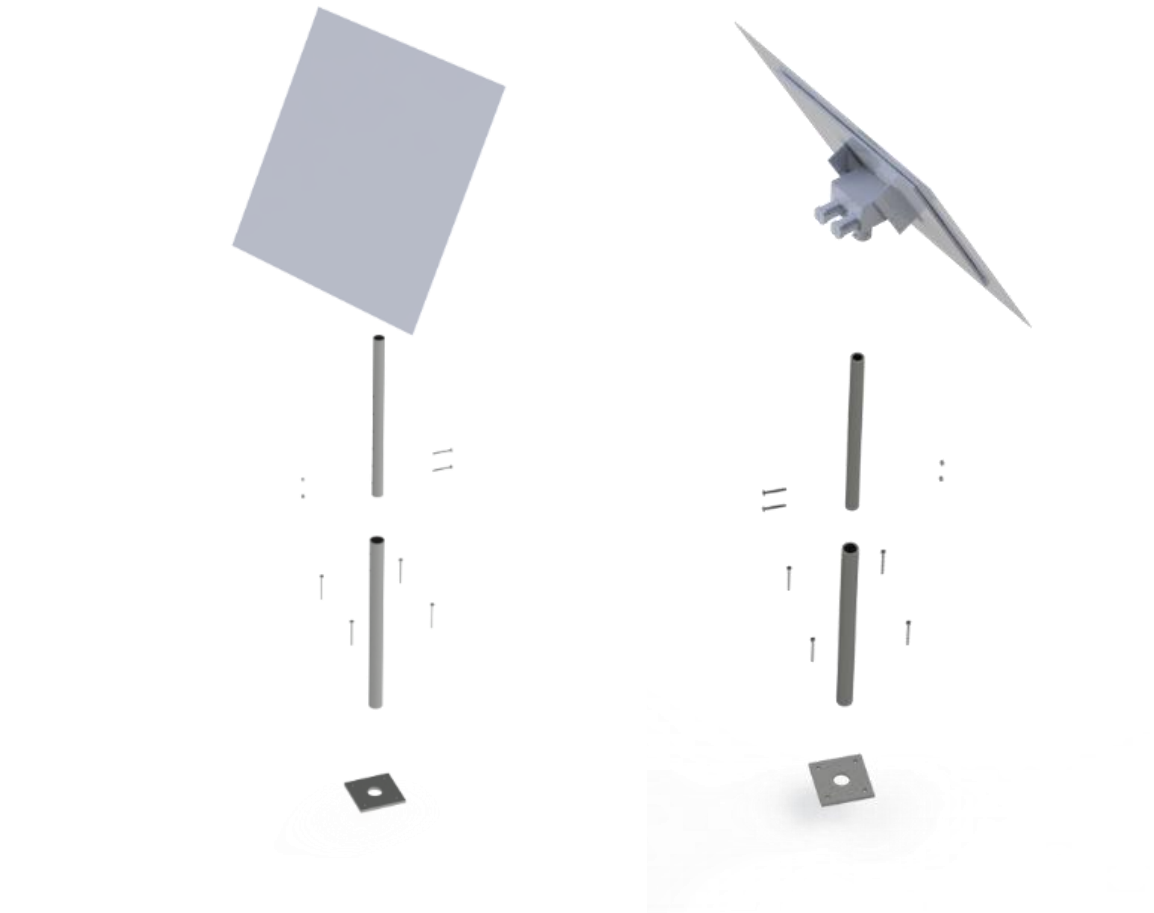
Full Heliostat Assembly exploded view [10] used with permission.
